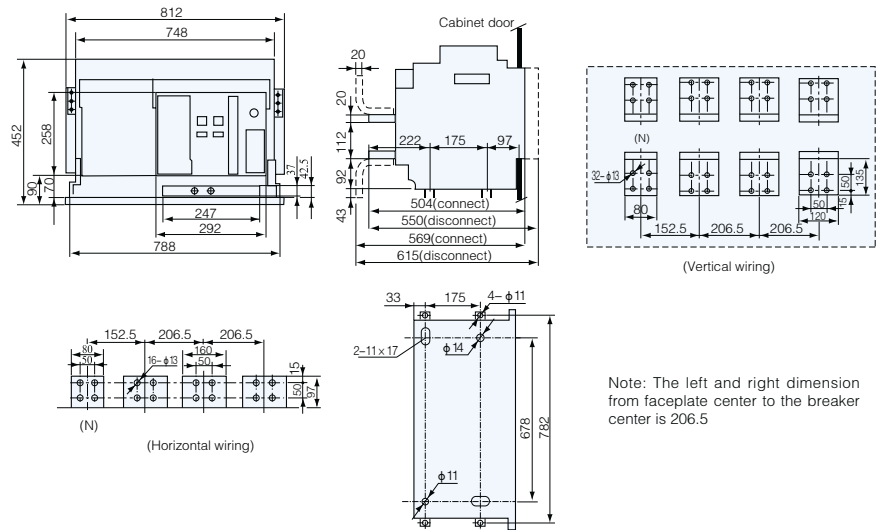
overall and mounting dimensions of drawer type breaker (OW18-4000/4)
